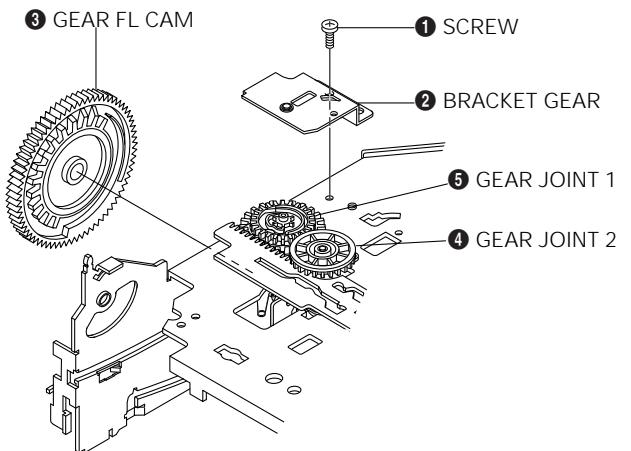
Bracket Gear, Gear FL Cam, Gear Joint 1, 2 Removal
